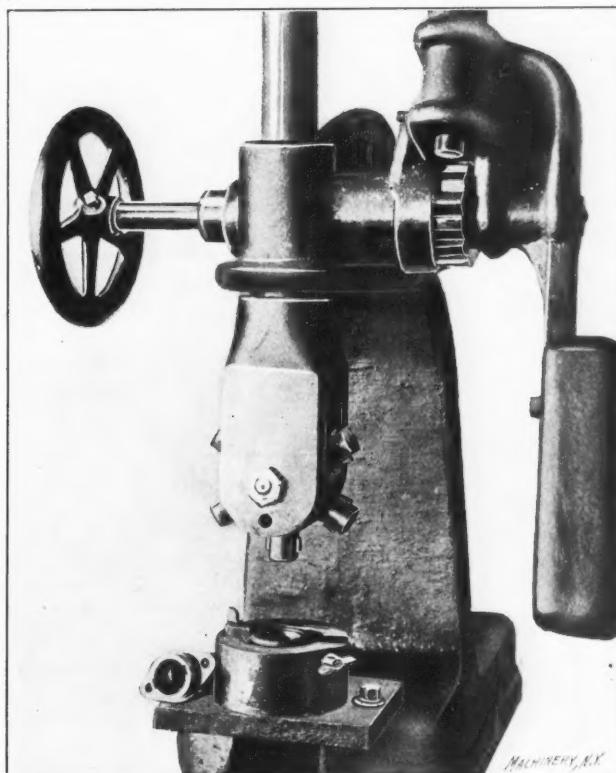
Revolving Broach used in an Arbor Press for Broaching to a Shoulder.
